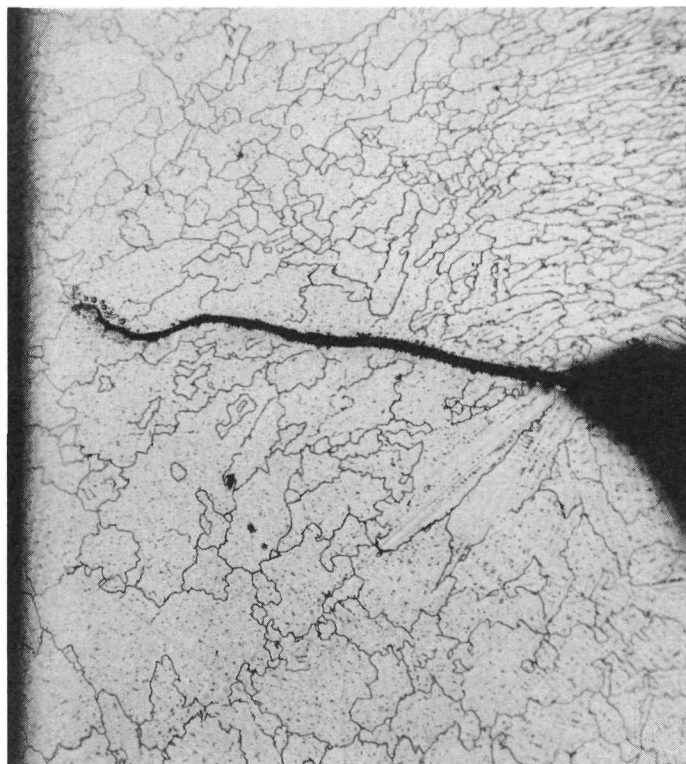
TIG WELD BEAD SHOWING 0.005 INCH FUSION ON SPECIMEN 1; MAGN 64X
